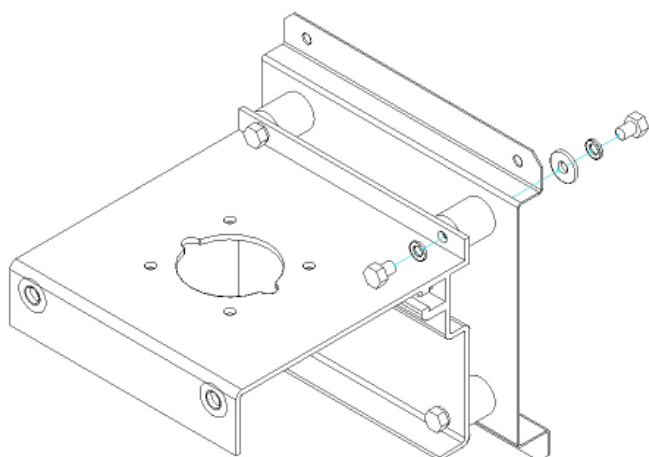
Attaching the mounting piece to the bulkhead with four 5 x 16 standard screws.
